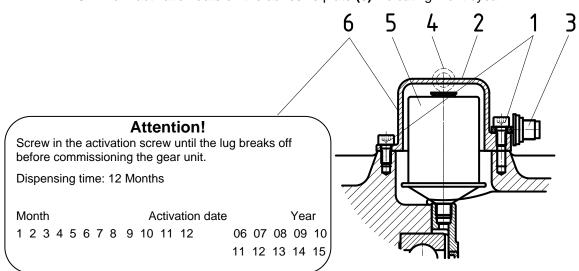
Activating the automatic lubricant dispenser with standard motor mounting
